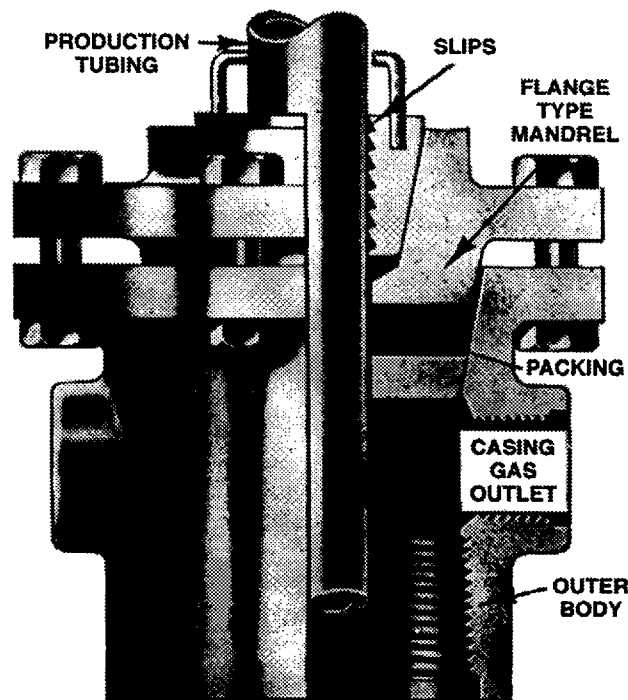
Another kind of slip and bowl type tubing head is shown in this cutaway drawing. The weight of the tubing and a bolted flange compress a gasket to provide sealing.
